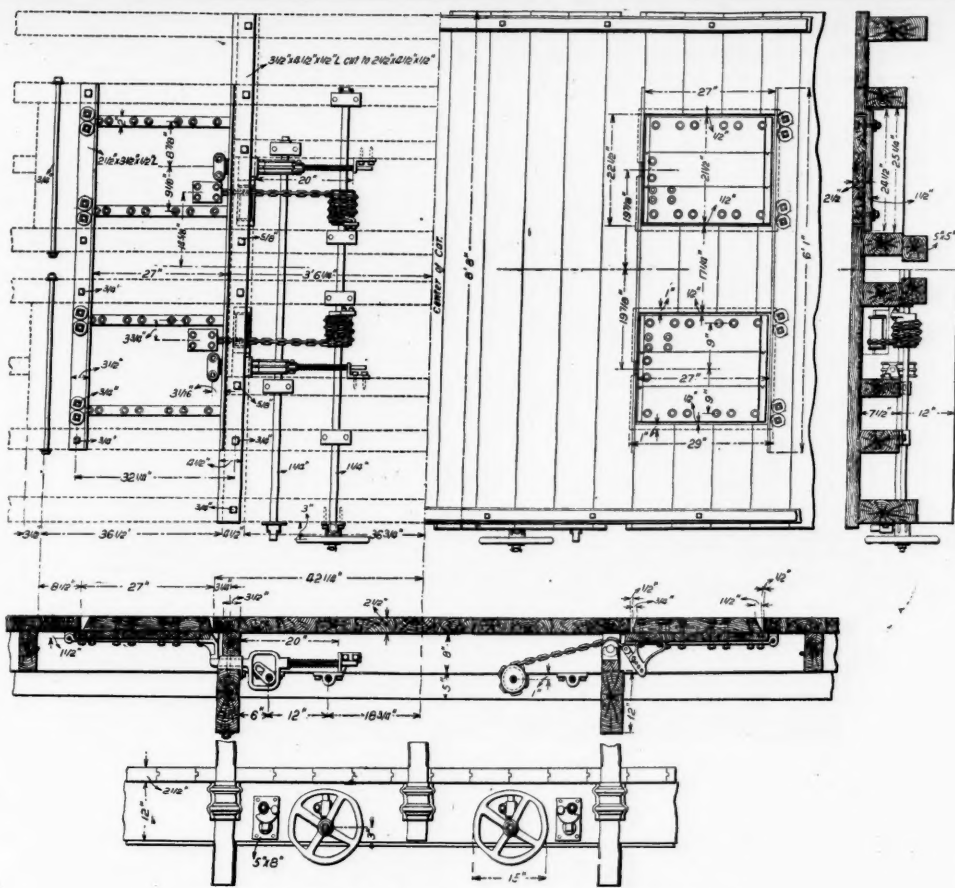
Details of Drop Doors—L. S. & M. S. 34-ft. Coal Car.
